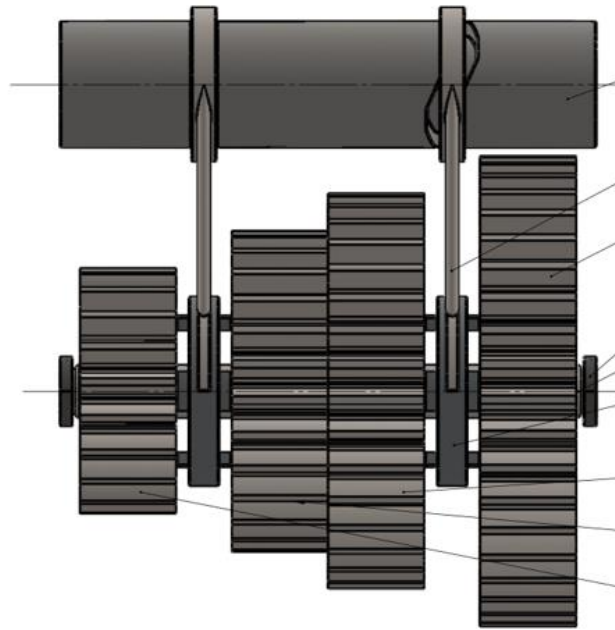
Assembly View of shifting mechanism on the input shaft, created in SolidWorks (see Appendix H)
